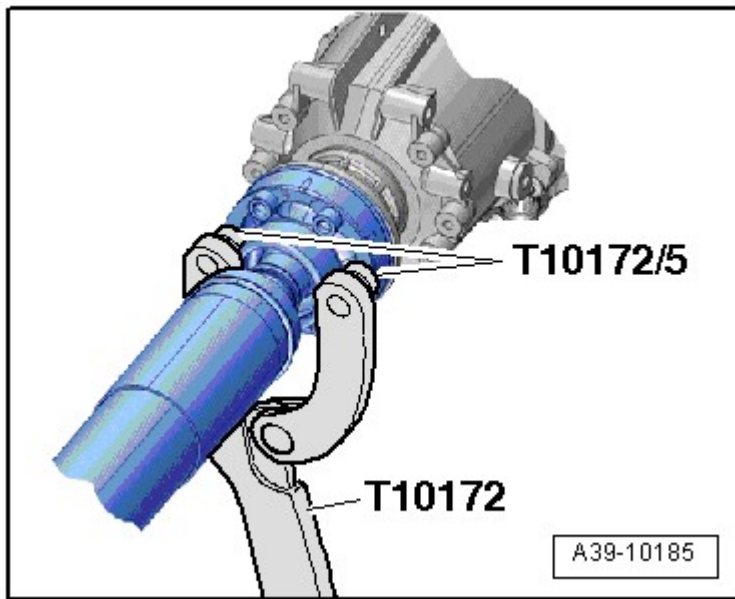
Counterholding Driveshaft Using T10172 And T10172/5
